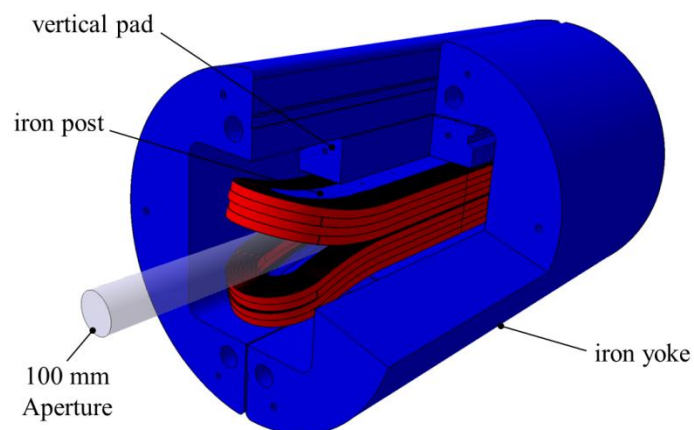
FRESCA2 mechanical support structure: coils and iron parts (cutaway view)
